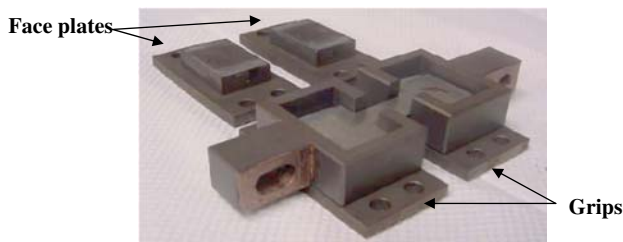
Inconel grips with tensile specimen (Ref 4)
